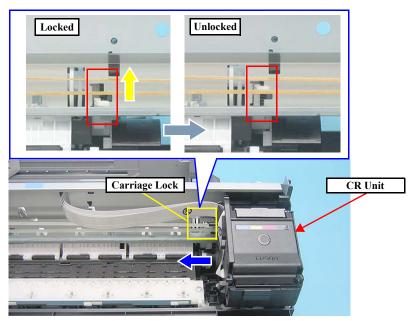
Unlocking Carriage Lock and Moving CR Unit to the Center
